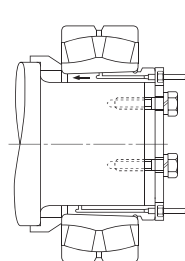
Mounting with Special Sleeve and Hydraulic Pressure
